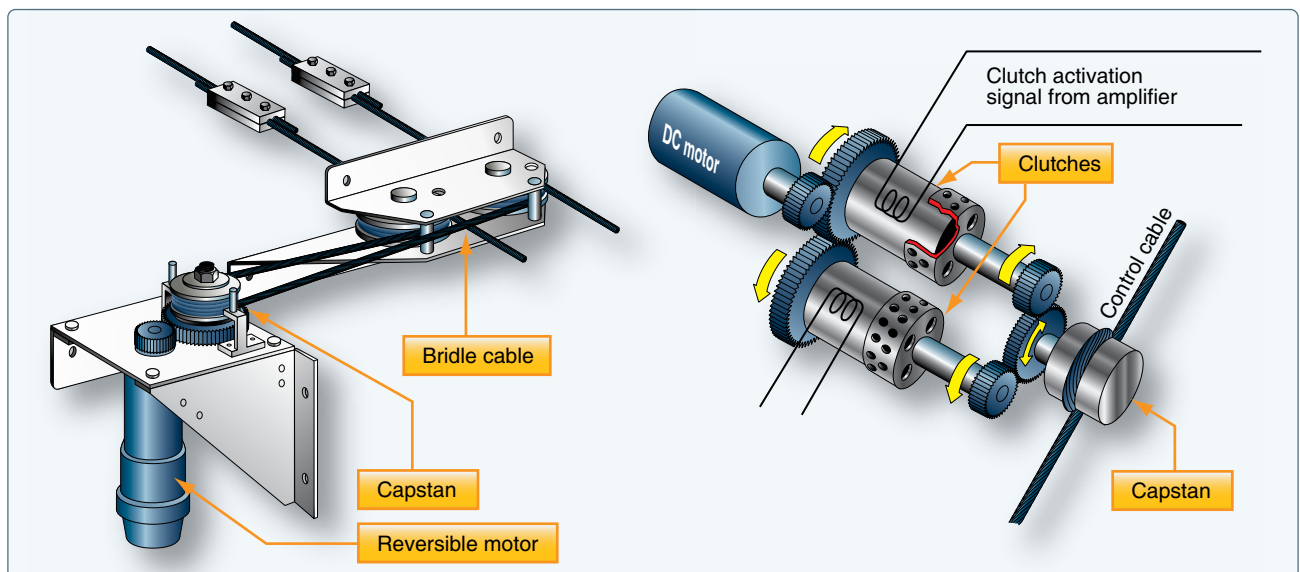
A reversible motor with capstan and bridle cable (left), and a single-direction constant motor with clutches that drive the output shafts and control cable in opposite directions (right).
